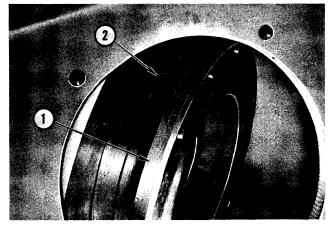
INNER BEARING CAGE 1. Cage 2. Oil Hole
